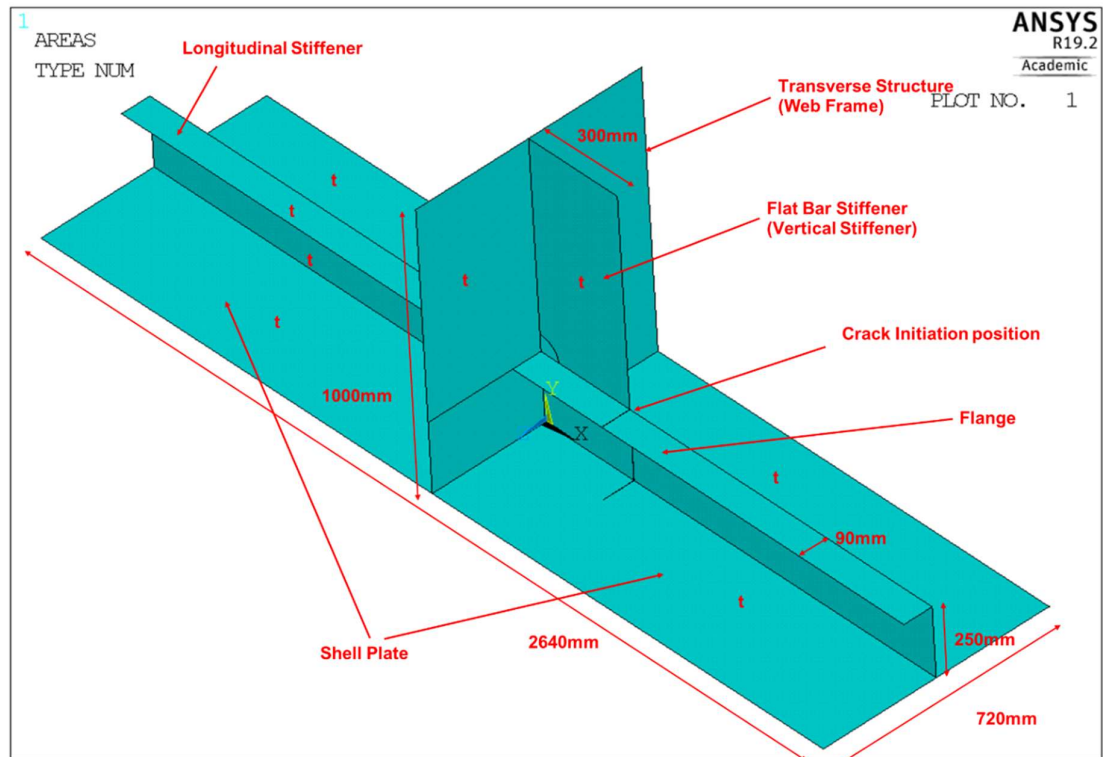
Illustration of longitudinal cracked and shell web cracked
